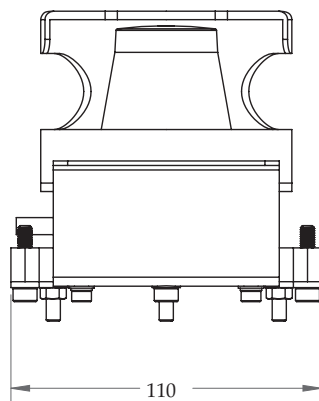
Side laser assembly rear dimensions (units in mm)
